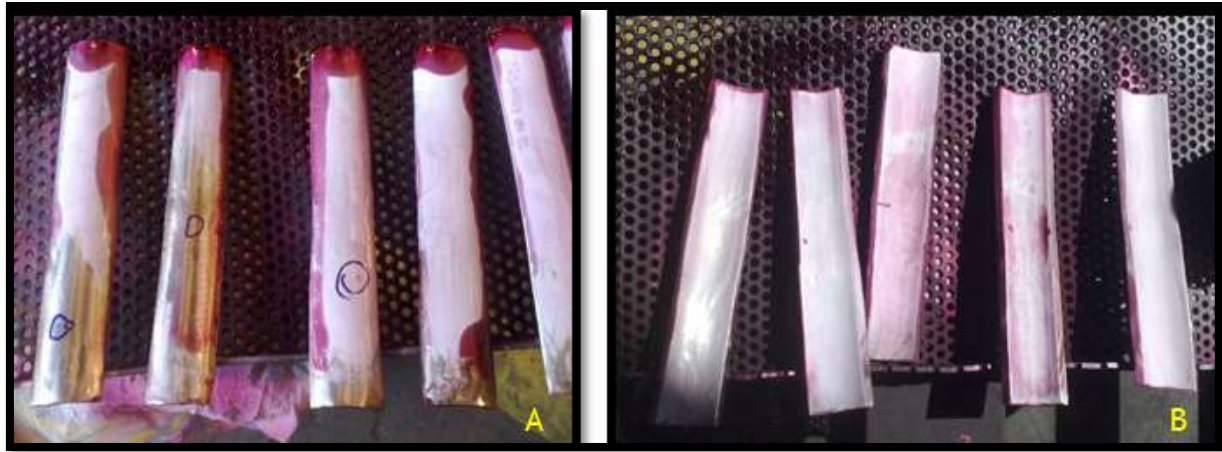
Liquid penetrant test after cutting the pipes: A. Outer surface; B. Inner surface
